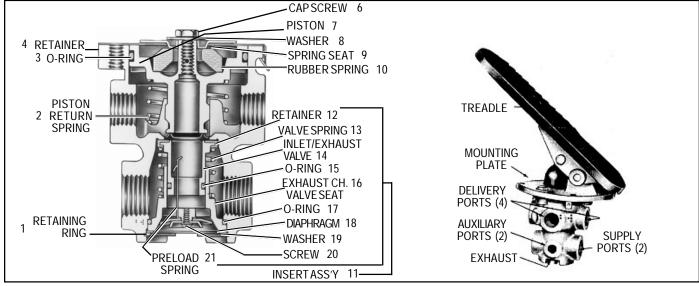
E-3™ BRAKE VALVE (SECTIONAL VIEW)
